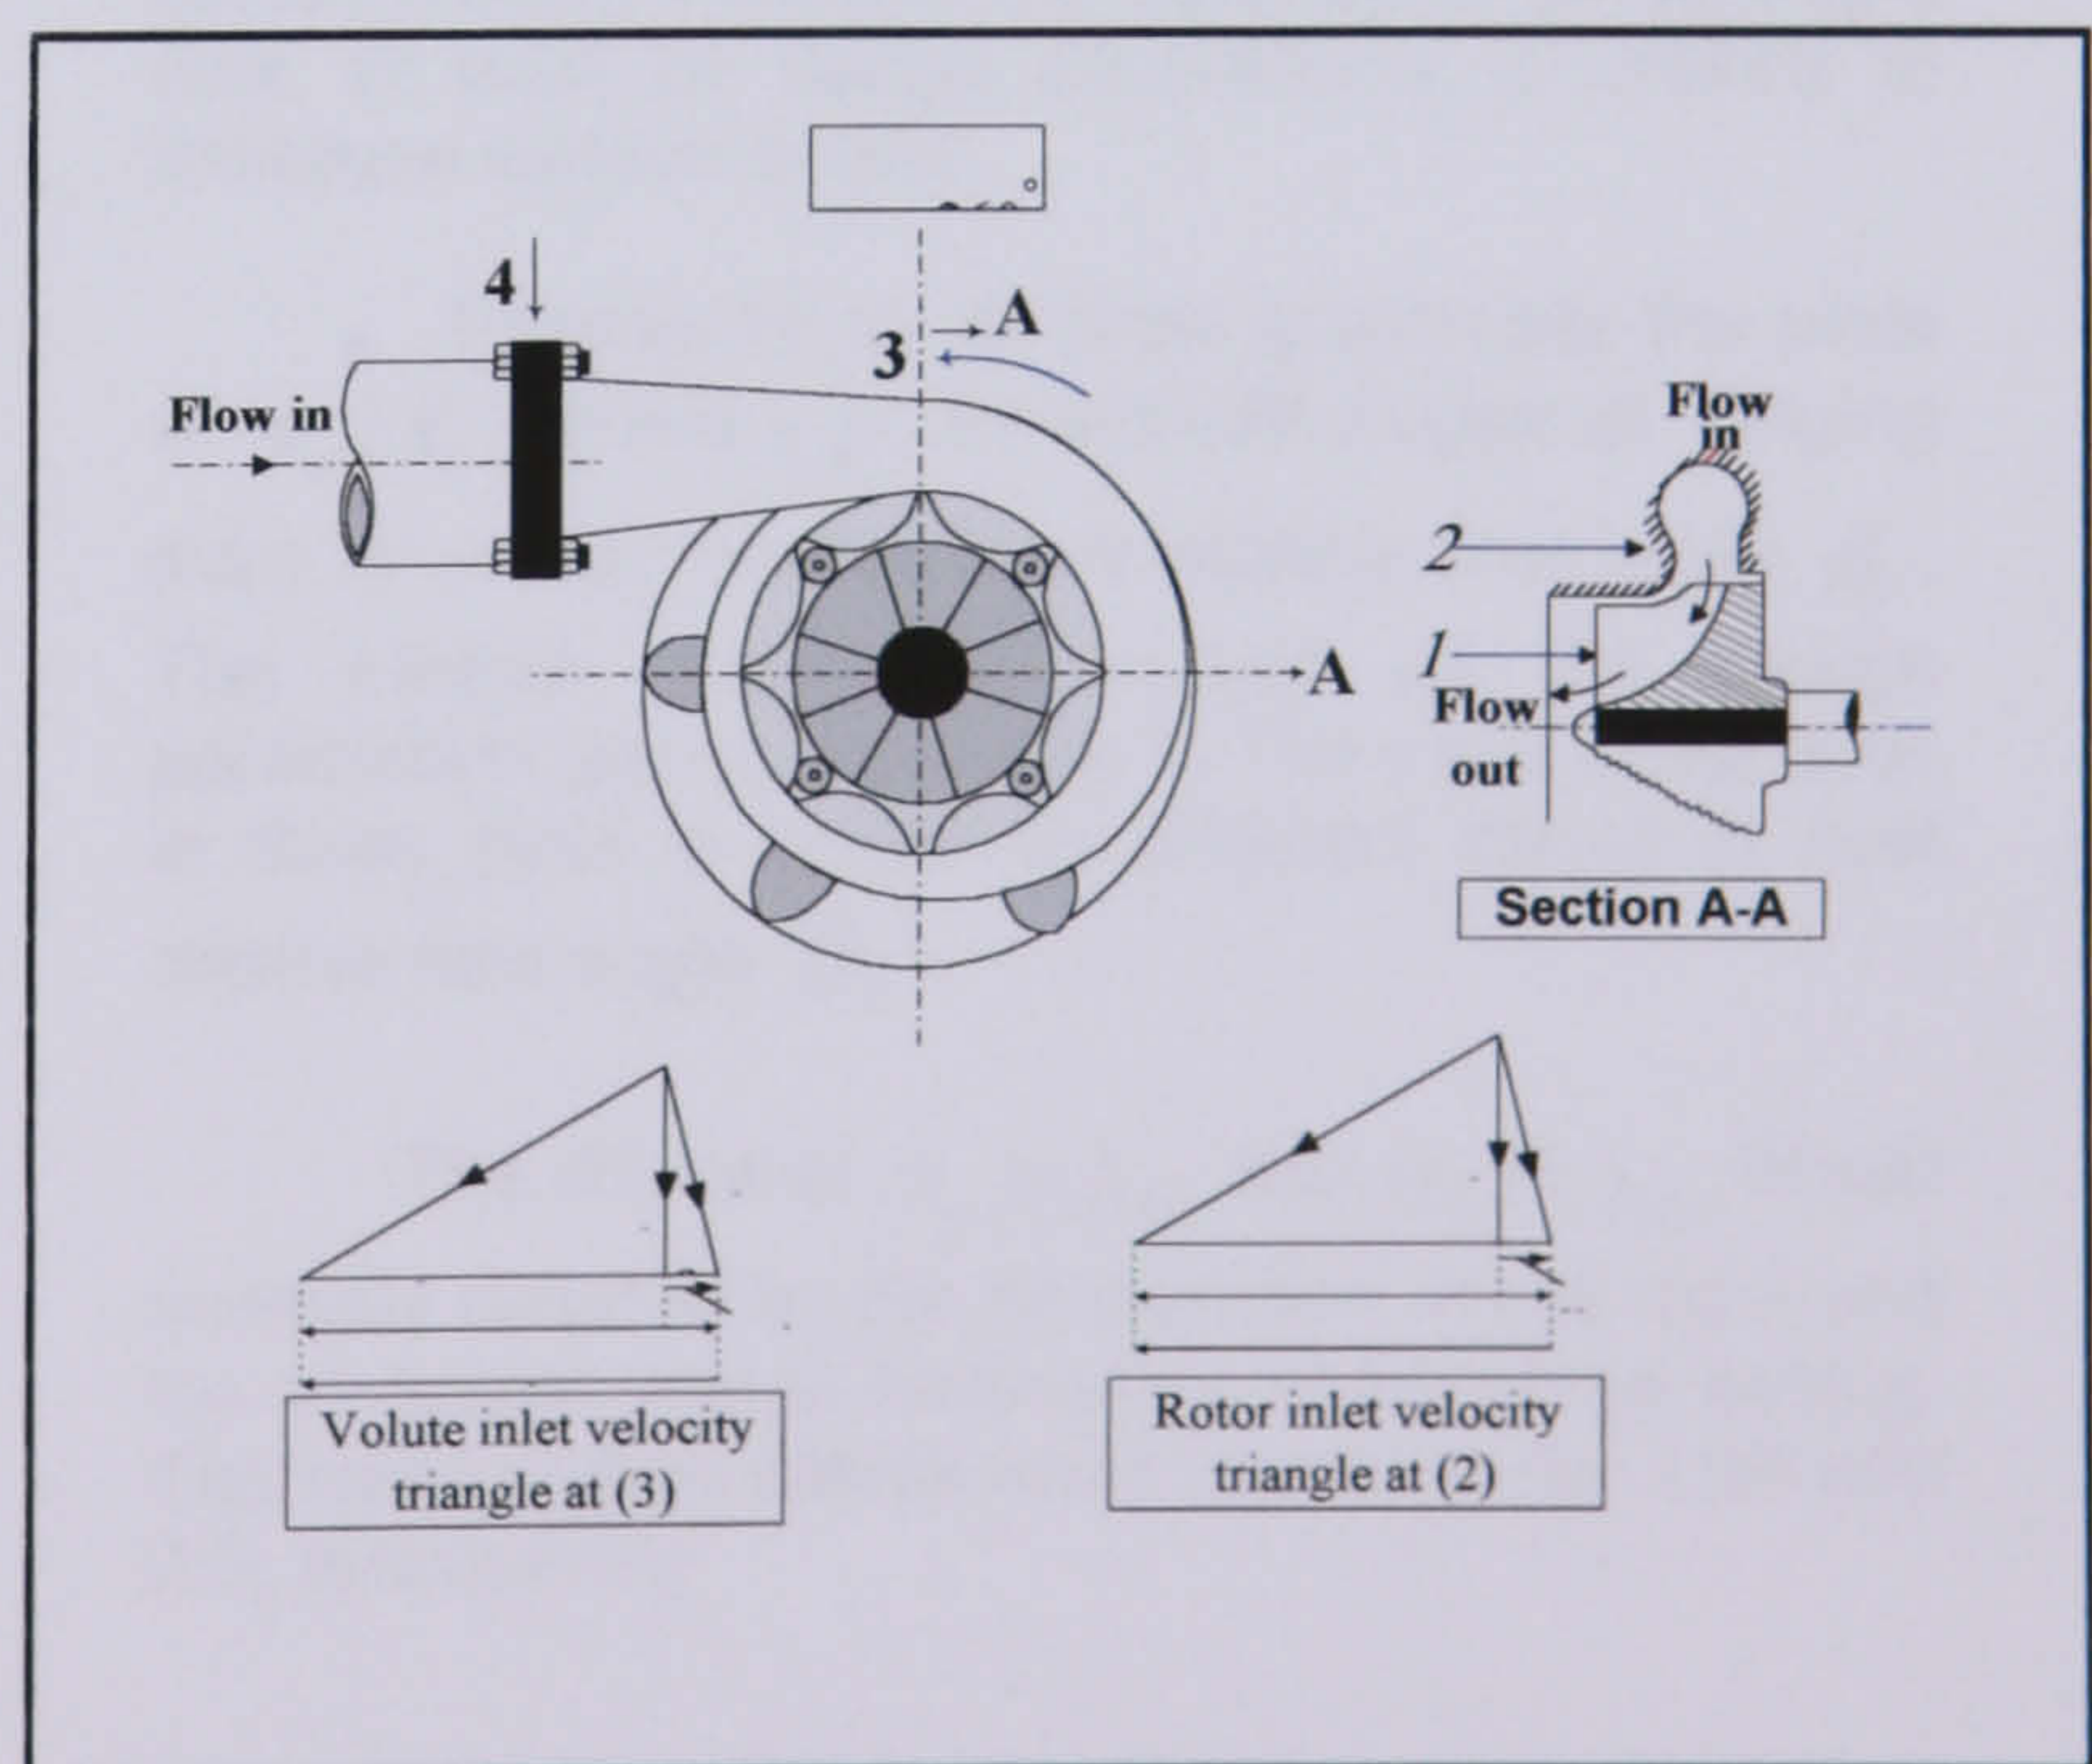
IFR turbine fitted with a single nozzle-less volute casing
